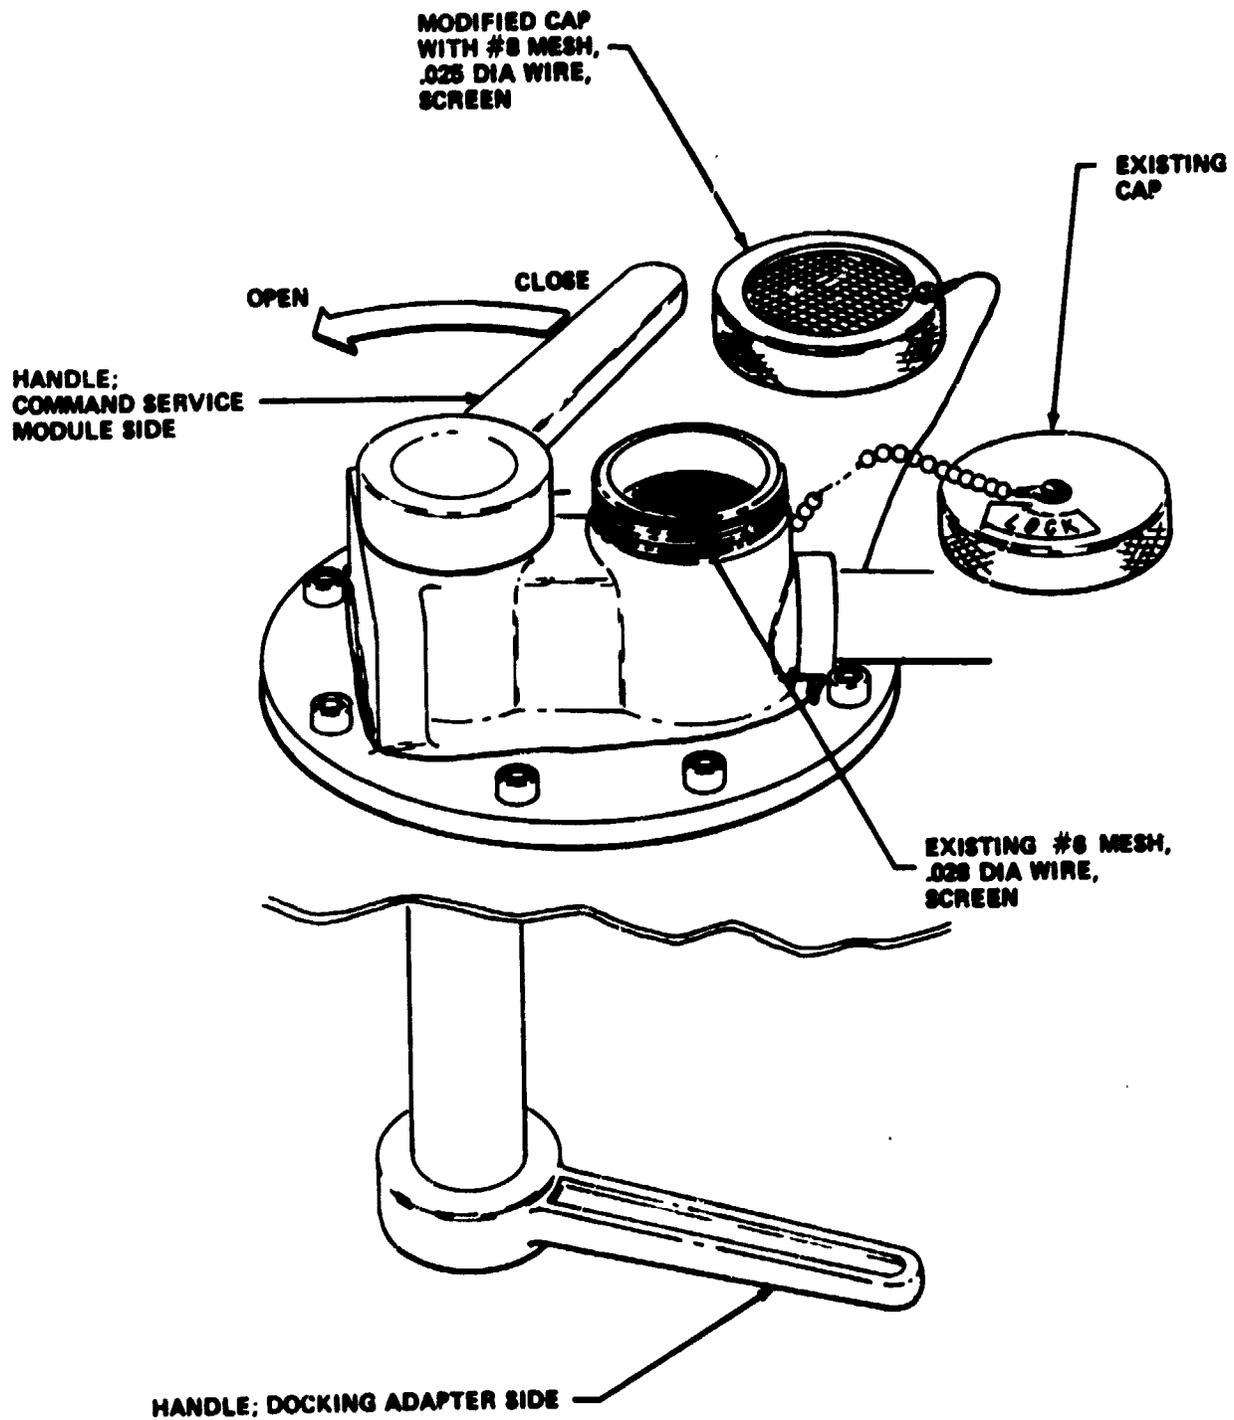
Butterfly Valve Assembly (with Modified Cap)
